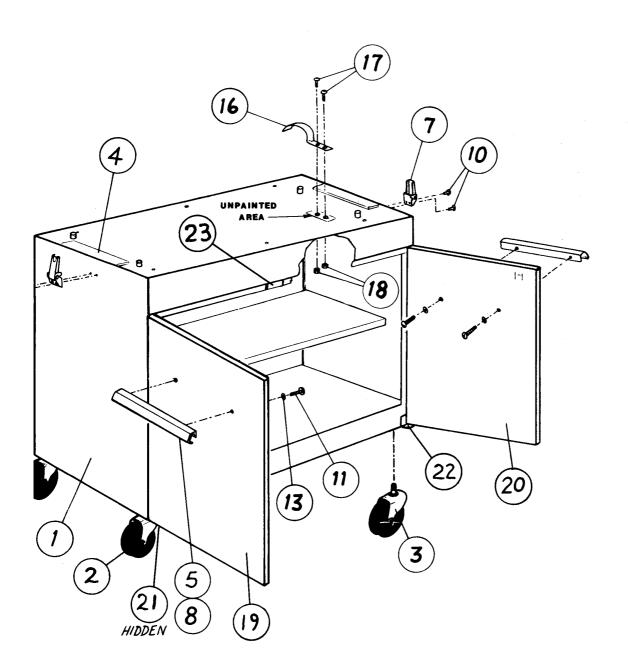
PARTS LOCATION DIAGRAM, CABINET STAND ASSEMBLY
